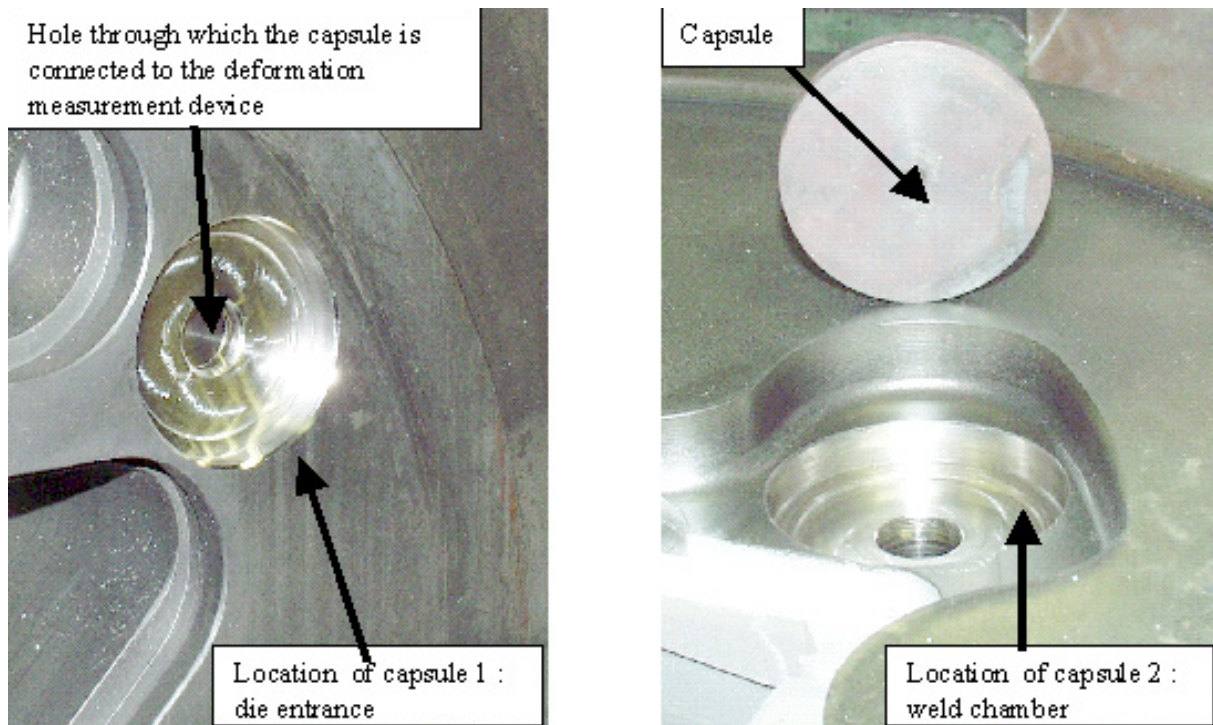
pressure measurement (1) at the die entrance, (2) within the weld chamber
